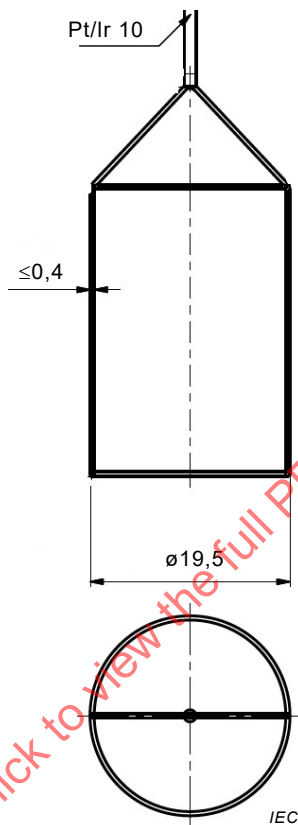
Dimensions of platinum-iridium alloy ring in mm
